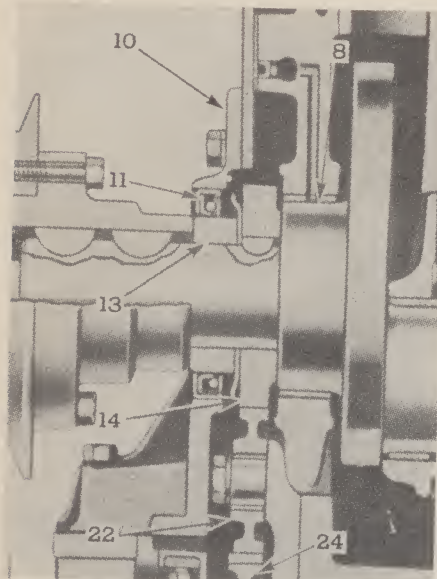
B—GM engine. Crankshaft front oil seal (11) is located in crankshaft front cover (10). Remove crankshaft pulley and oil seal spacer ring (13) to renew seal.
